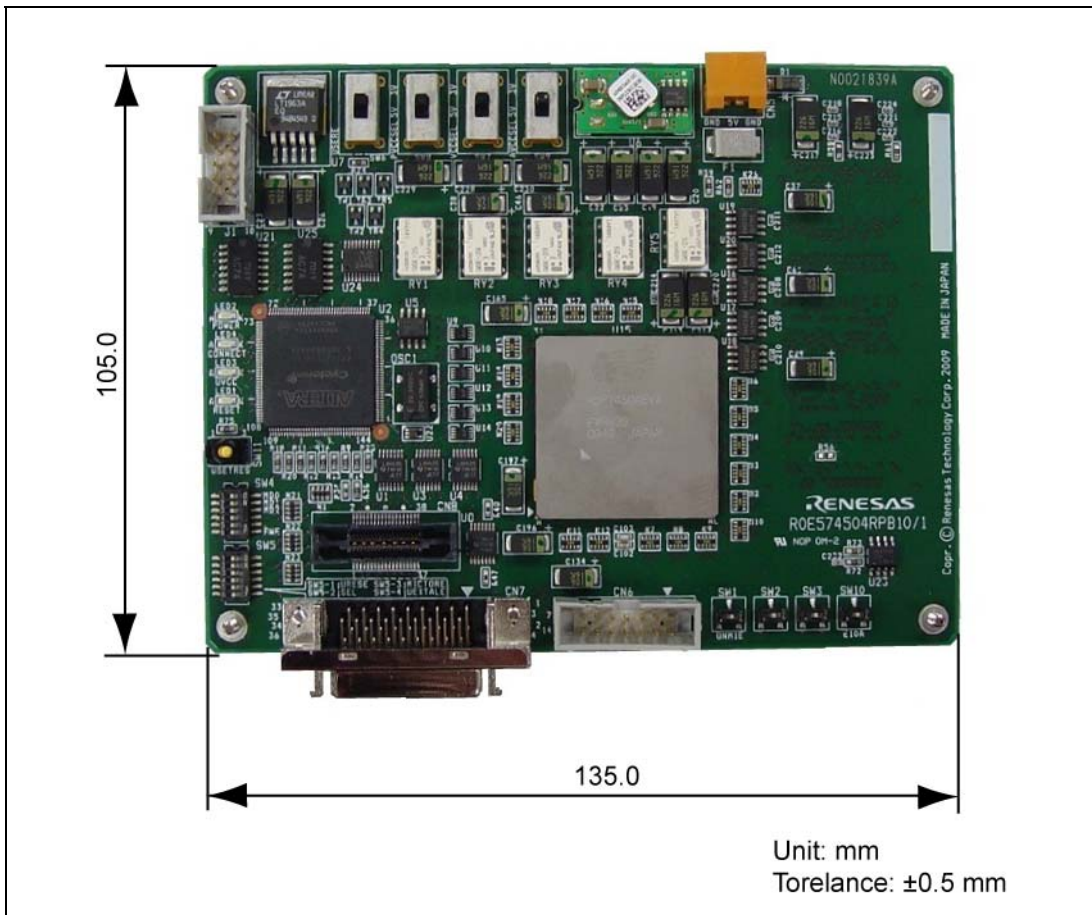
External Dimensions of the Main Unit of the Debugging MCU Board
